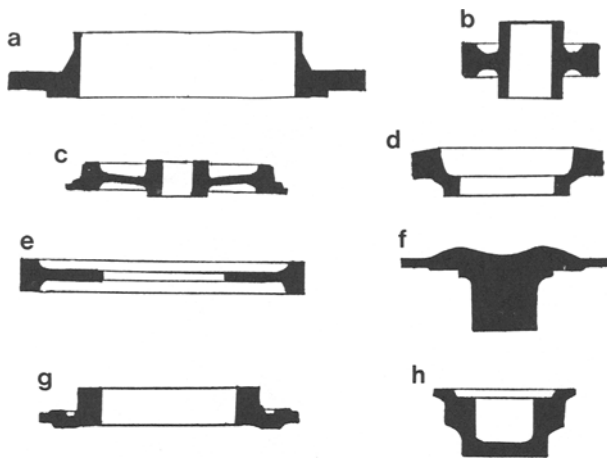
Axisymmetric parts hot rotary forged on AGW125 and AGW400 machines [5, 15] (a) Weld neck flange, (b) Crane wheel preform, (c) Railroad wheel, (d) Bevel gear preform, (e) Ring gear preform, (f) Clutch disc, (g) Hub, and (h) Bearing ring.
